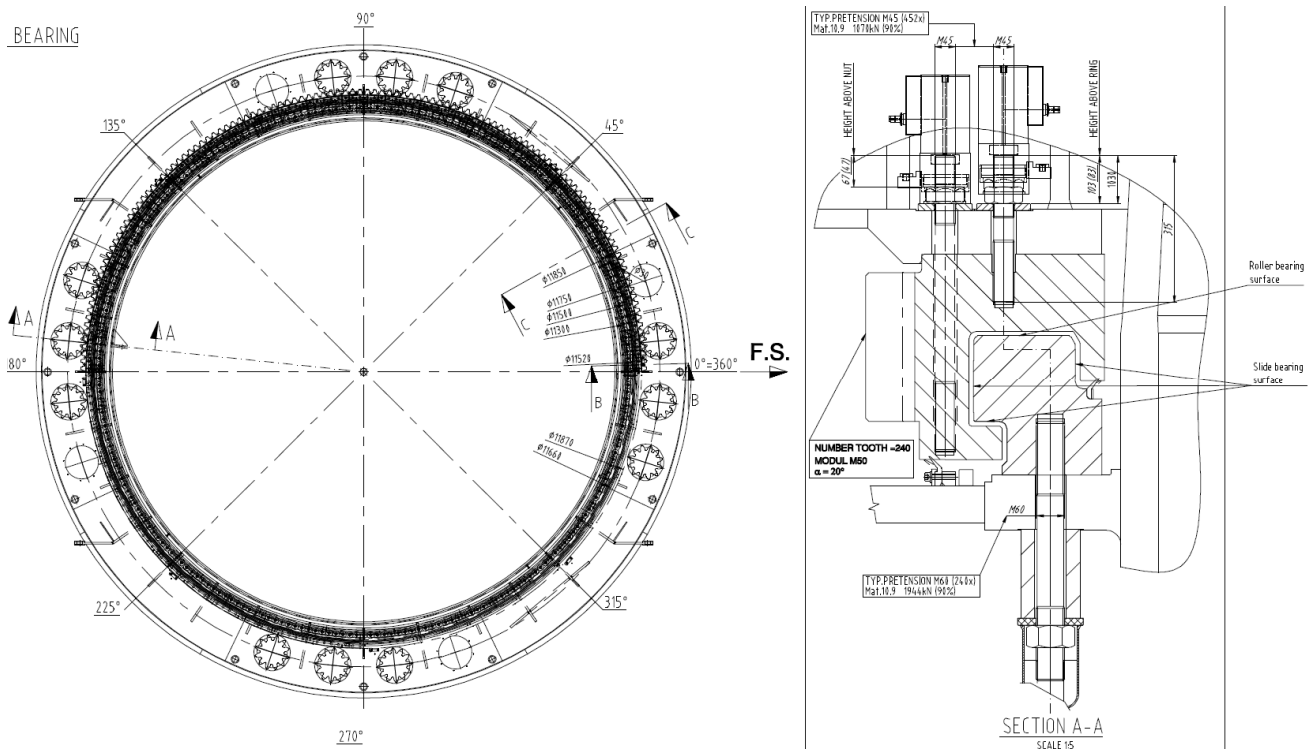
Top view of the Aegir's slew bearing (left) and the cross sectional area of the bearing (right) (HMC)
